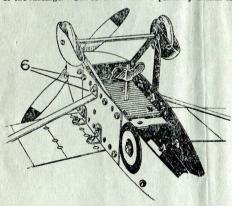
Underside view of a model aeroplane showing Motor in position.
